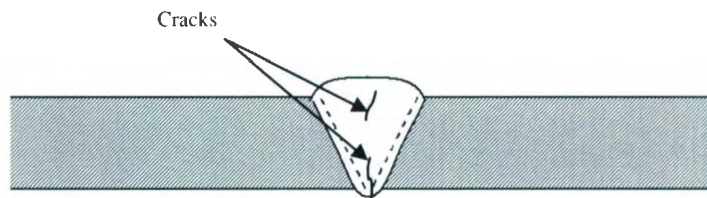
Cracks in the radiograph of welding joint
